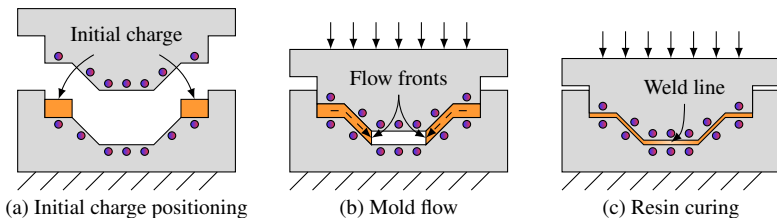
The SMC compression molding process. In (a) placing two semi-finished SMC initial charges, (b) compression molding and (c) weld line formation.
